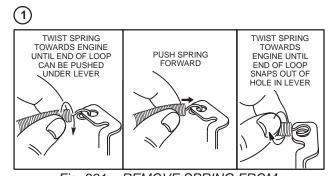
REMOVE SPRING FROM CONTROL LEVER
